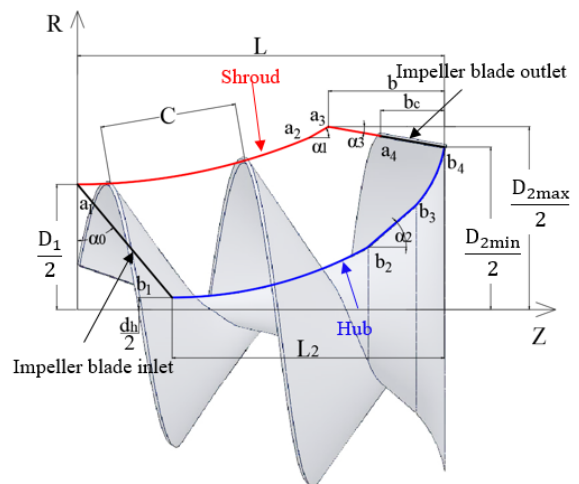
Meridional plane shape of screw centrifugal impeller blade model with straight inlet shape
